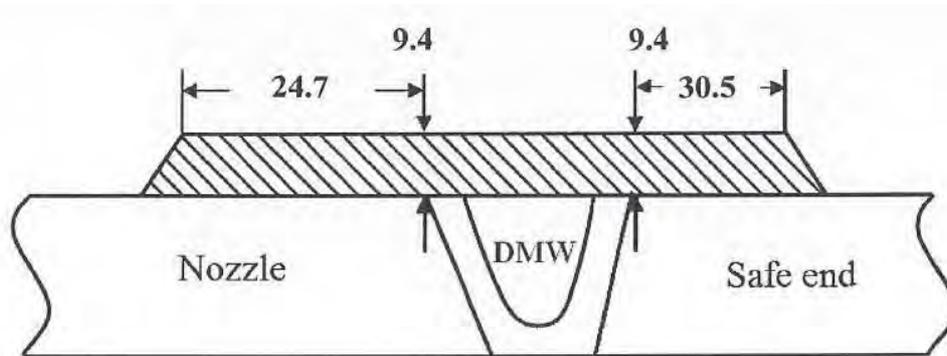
Full Structural Weld Overlay geometry, minimum required dimensions in [mm]
